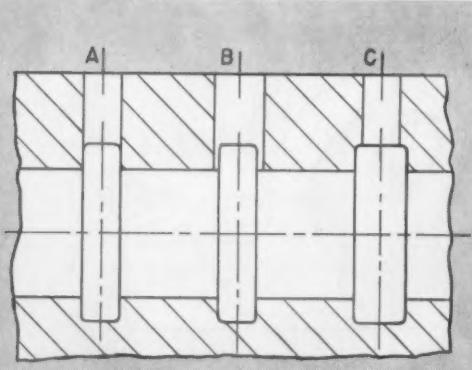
Sketch of bored and reamed cast iron piece shows three hole and groove designs.
